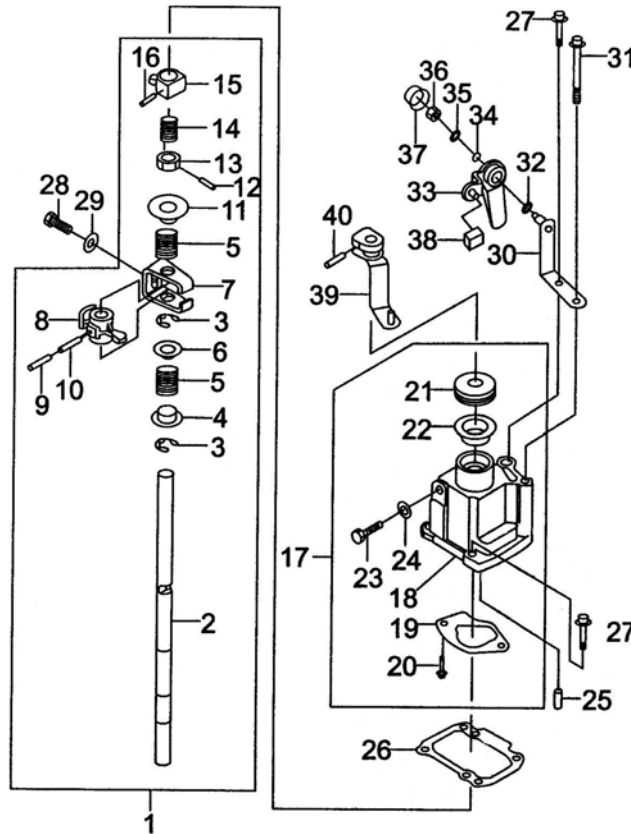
Transmission assembly(five gear) – gear shift assembly
